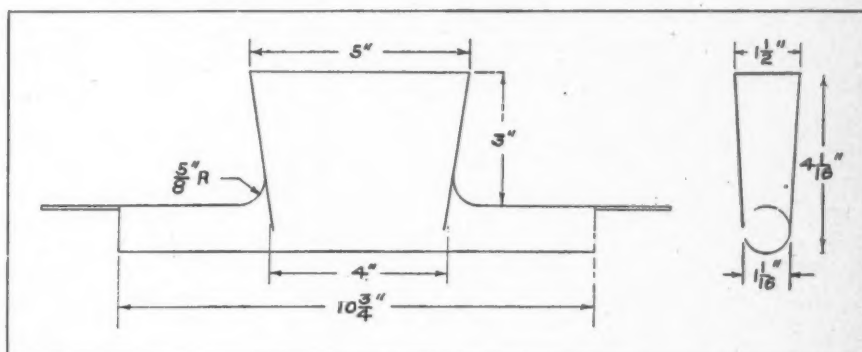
(B)—Sketch of casting D-14 for obtaining single cast tensile bar. A 1 1/16 in. diameter x 10 3/4 in. long test bar is provided from which the tensile specimen is machined with the gage length located in the sound metal directly under the head.
